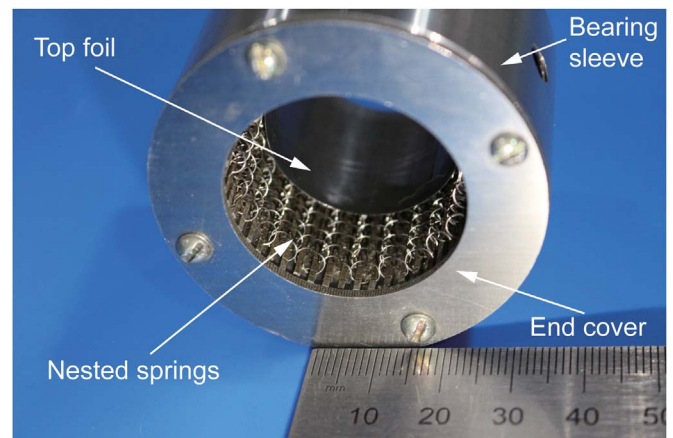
Photograph of prototype nested compression spring gas foil bearing.
